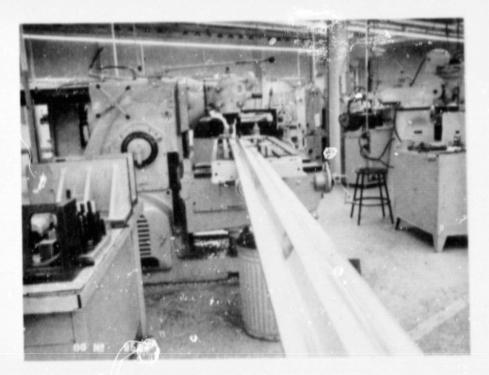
Machining of Hat Tool for 100-Inch Subcomponent
